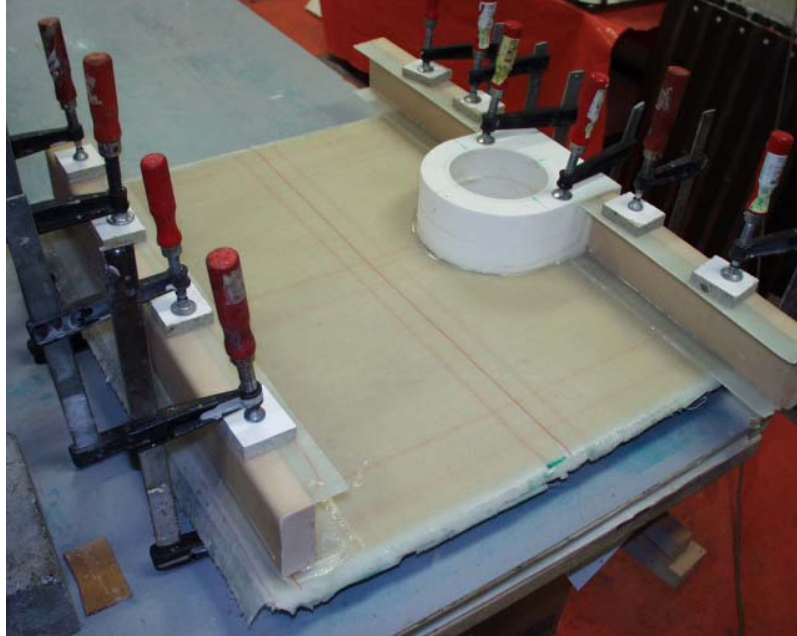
(a) Bonding of Ceiling, Floor and Hardpoint Insert to Sidewall
